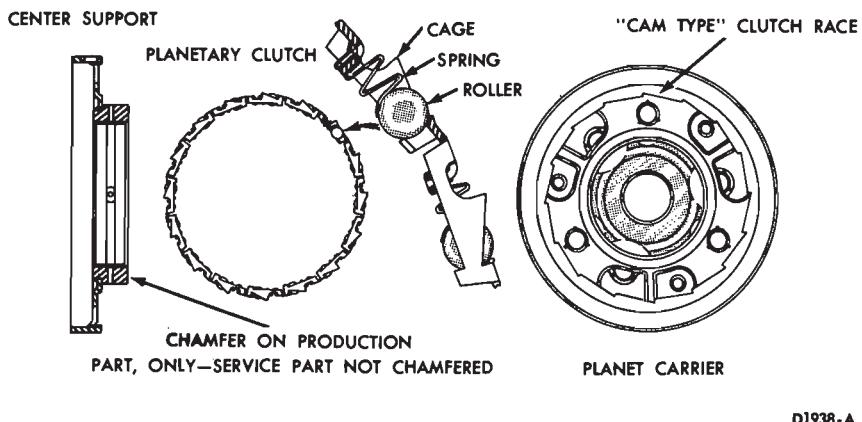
Roller Type Planetary Clutch, Carrier and Center Support
